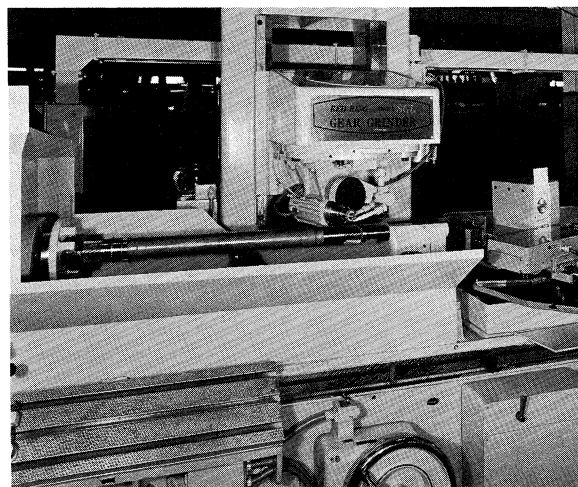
Grinding a long-shaft helical gear in a grinding center. The automatic wheel dresser is at the right.
